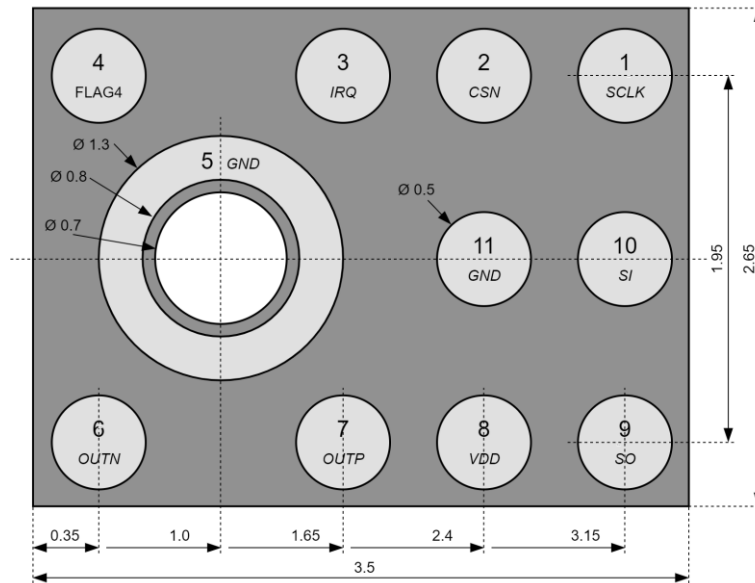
Pad location and sizes, top view “through” the device, unit is millimeters
